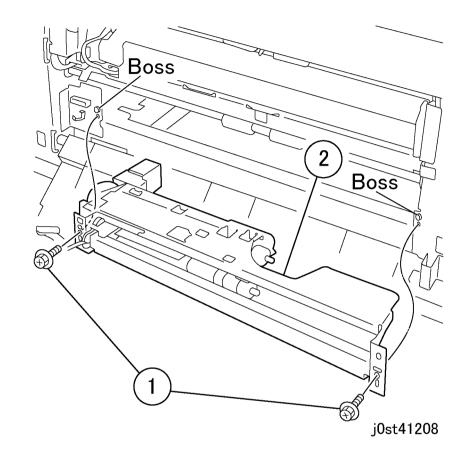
Removing the Tray 4 Feeder (j0st41208)
